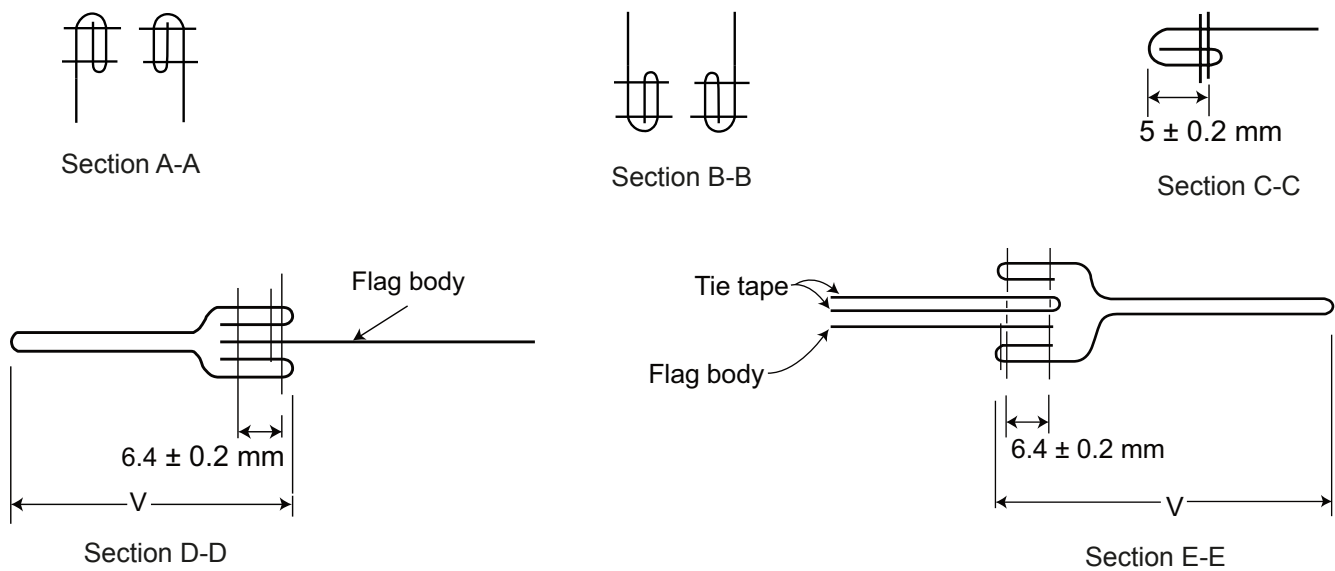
Construction details – Subtypes 1B and 2B flags – Separate header
